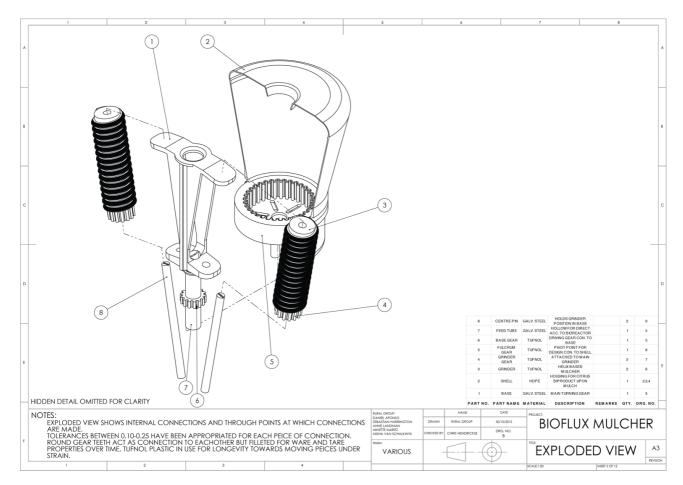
Bioflux technical drawing of exploded view (Bioflux student group, 2019)
